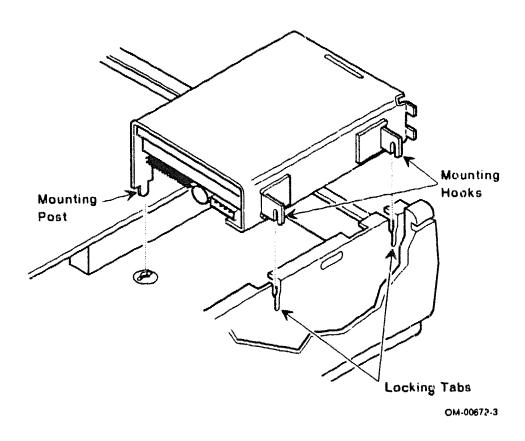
Removing a 3.5-Inch Mass Storage Device
